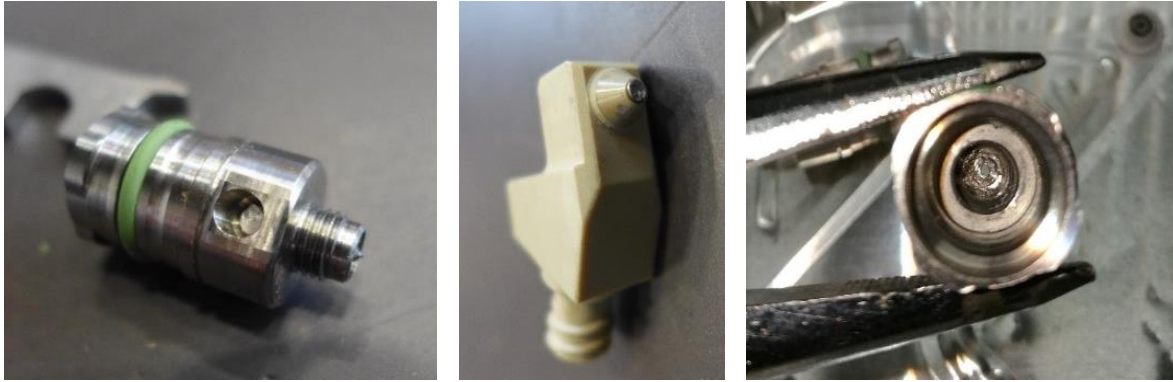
Dispenser parts blocked with solidified LBE. From left to right: LBE stuck in the opening of the lower part of the fluid box body; in the cartridge base; in the nozzle opening.
